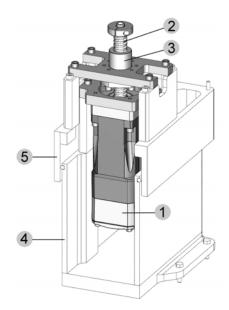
Adjustment drive for the volume adjustment of the dosing chamber
